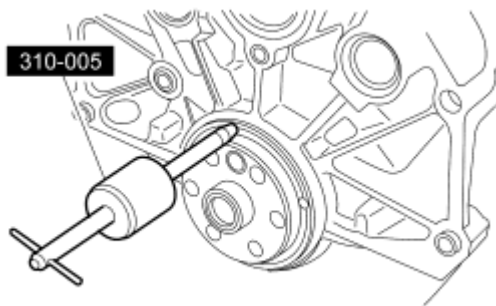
Removing Crankshaft Rear Seal Using Special Tools (310-005)
